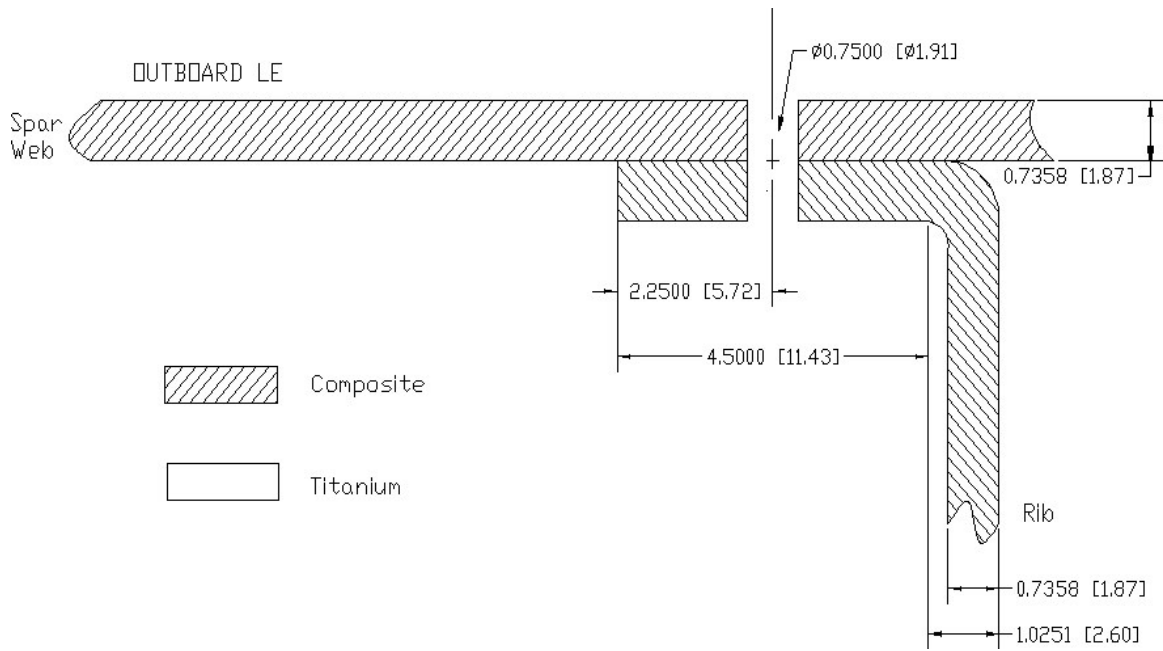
Rib-to-Spar Joint General Arrangement, Cross-sectional View. All Dimensions are in inches [cm]
